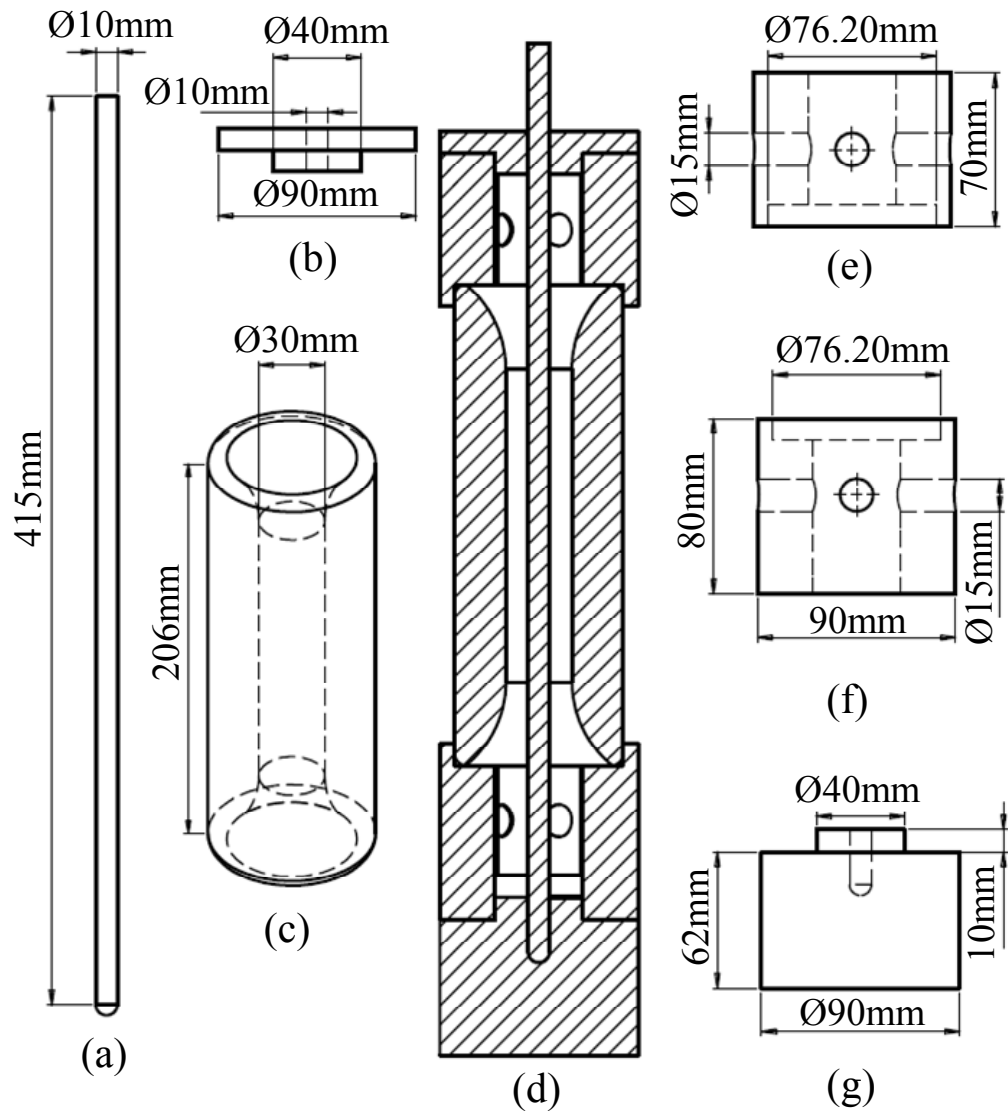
Design schematic of Prototype I – (a): conductor, (b): top insulator, (c): enclosure, (d): cross-section view of the fully assembled prototype, (e): support insulator_1, (f): support insulator_2 and (g): bottom insulator.
